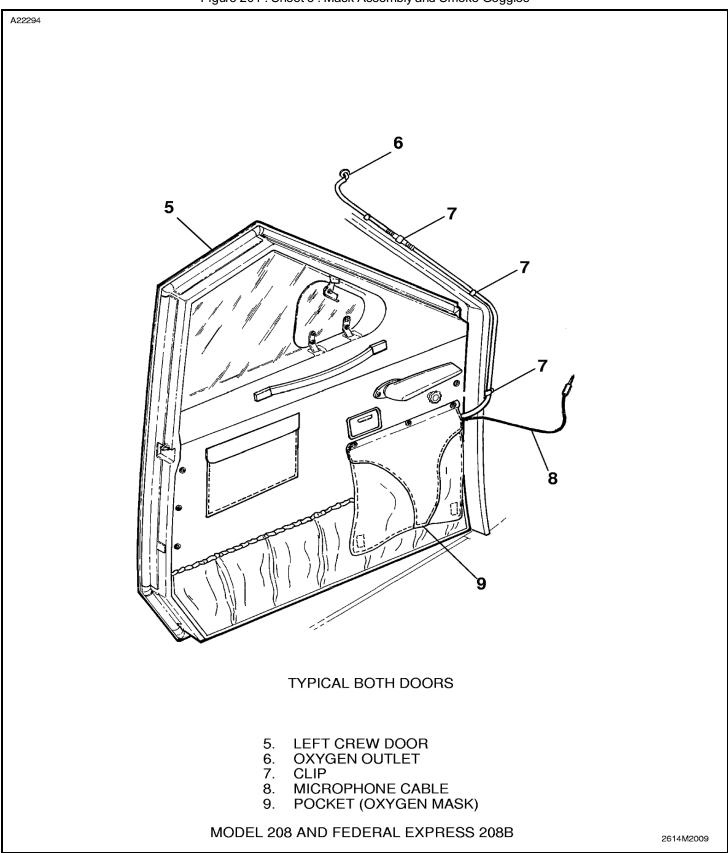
Sheet 3 : Mask Assembly and Smoke Goggles
